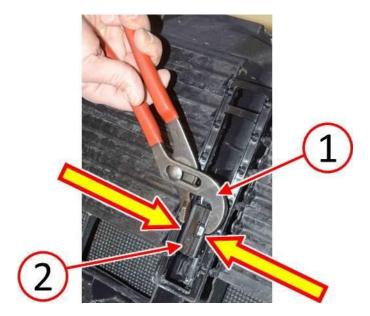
Engage Actuator Motor Case Housing With Adjustable Pliers
